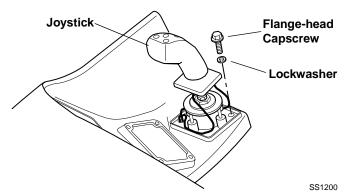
For *Current Production Vehicles*, remove the flange-head capscrews and lockwashers securing the joystick assembly to the console.
